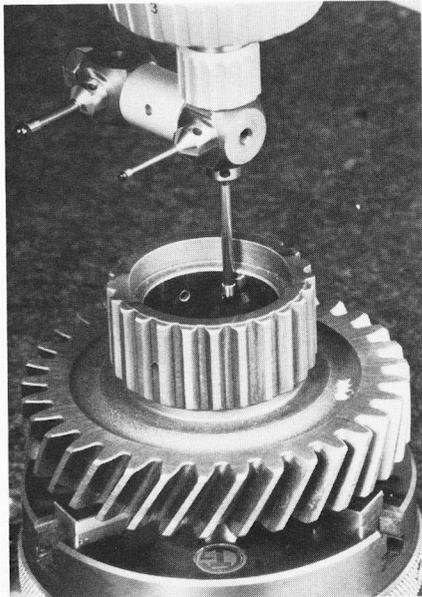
Measurement of a gearwheel on a 3D measuring centre, using functional surfaces as basis of the measurement
